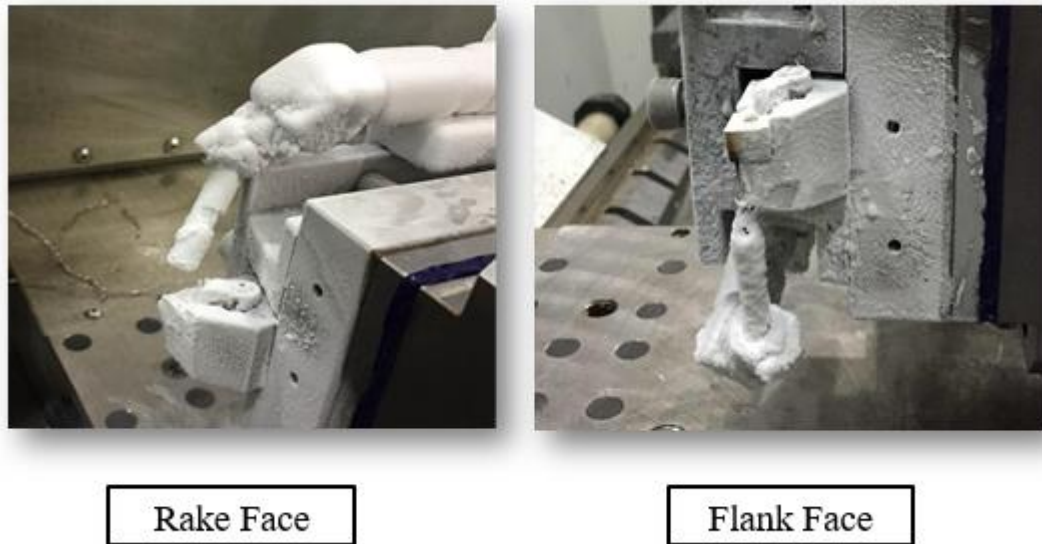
The Nozzle Position in Cryo-cooling Machining
